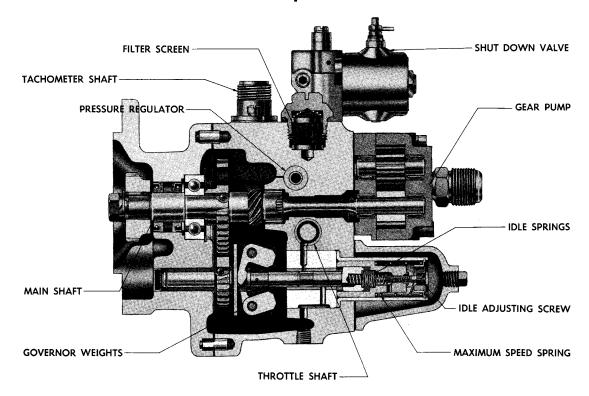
Cross section PT pump with idling and high-speed mechanical governor
